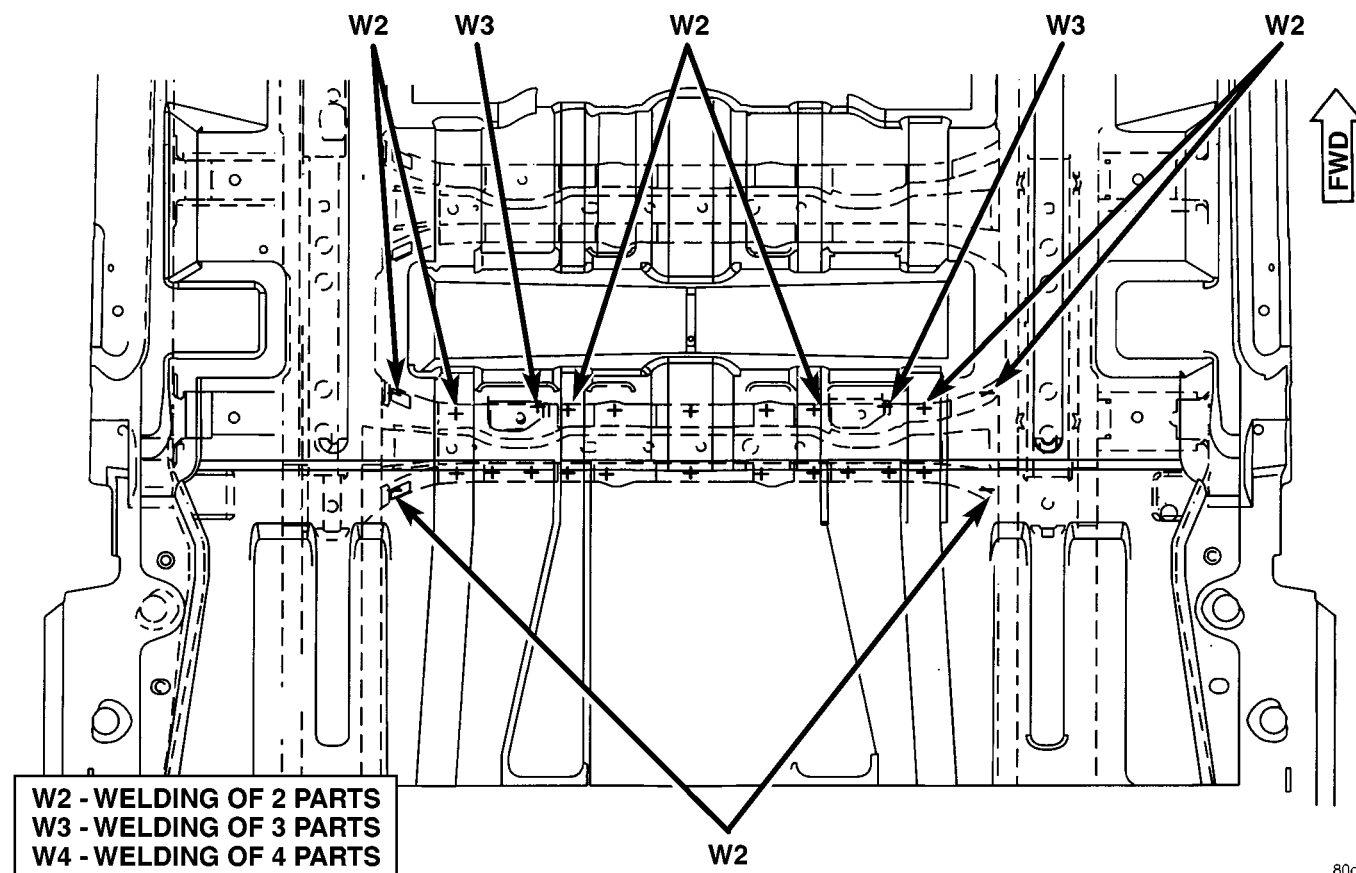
JACK MOUNTING BRACKET - LONG WHEEL BASE SHOWN, SHORT SIMILAR
